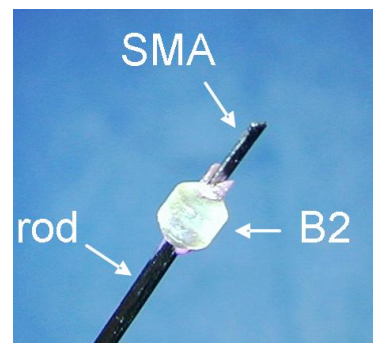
Side component type B made of joint element type B, CFR, and SMA.
